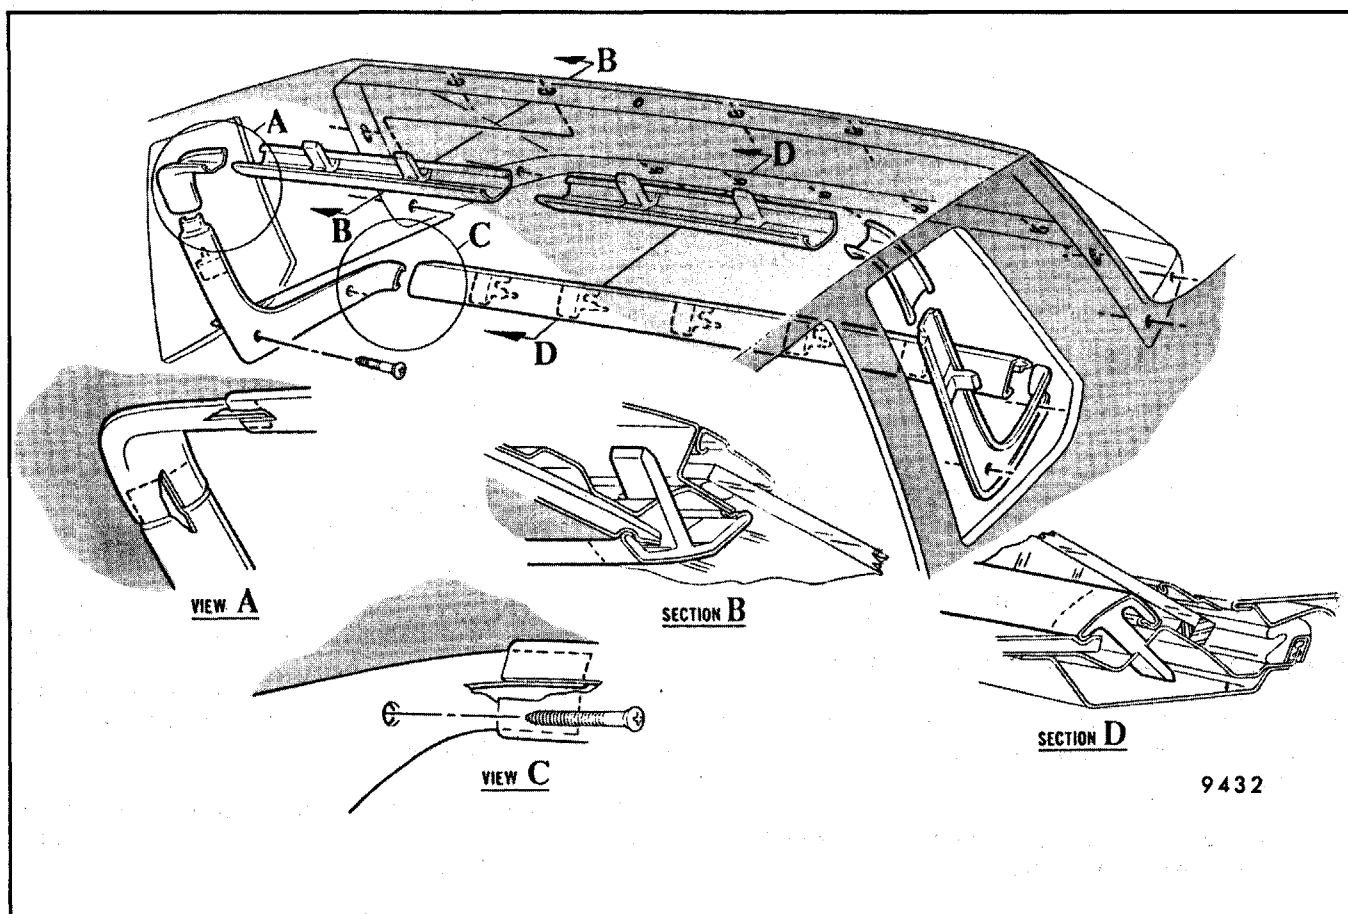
Back Window Garnish Moldings - "B,C" Styles
